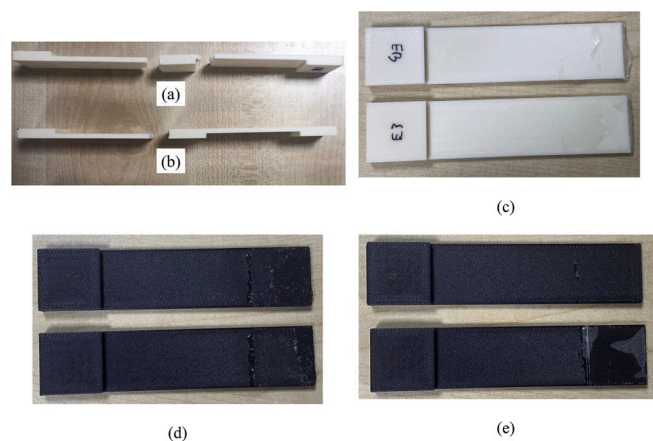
Types of failure modes observed in single lap shear test specimens. (a) Substrate failure at both adherends, (b) substrate fracture at one adherend, (c) fracture surface of ASA adherend with epoxy exhibiting adhesive failure, (d) fracture surface of NCF adherend with CA, (e) fracture surface of NCF adherend with epoxy.
